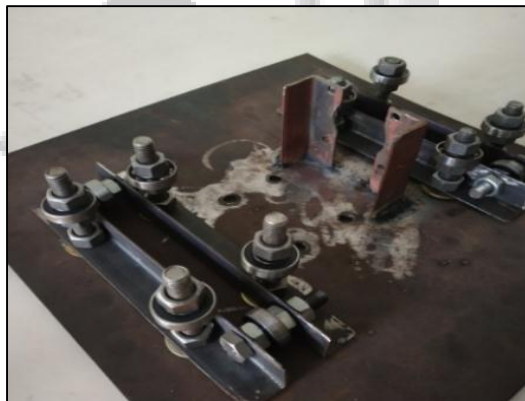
Indigenous Fabricated Sliding mechanism for X & Y axis
